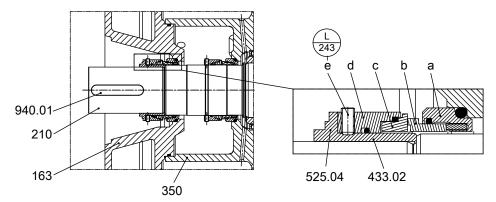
Installing the impeller-end mechanical seal for motors 320 6.N, 360 6.N, 400 6.N, 440 6.N
